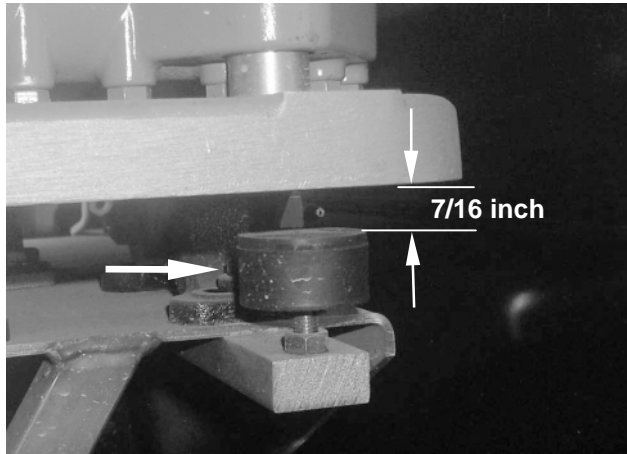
A safety stop now limits compressor travel and prevents damage to surrounding components should drive belt failure occur. The stop is adjusted to leave a 7/16-inch gap between the rubber bung and the lower edge of the compressor base after the powerband has been run in.
